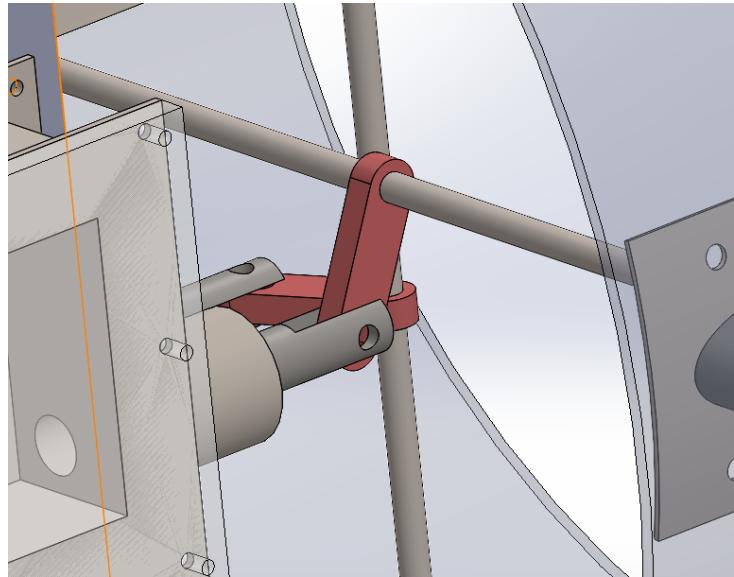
Simple crank slider mechanism. An aluminium link is attached between the linear actuator and the elevator shaft.
